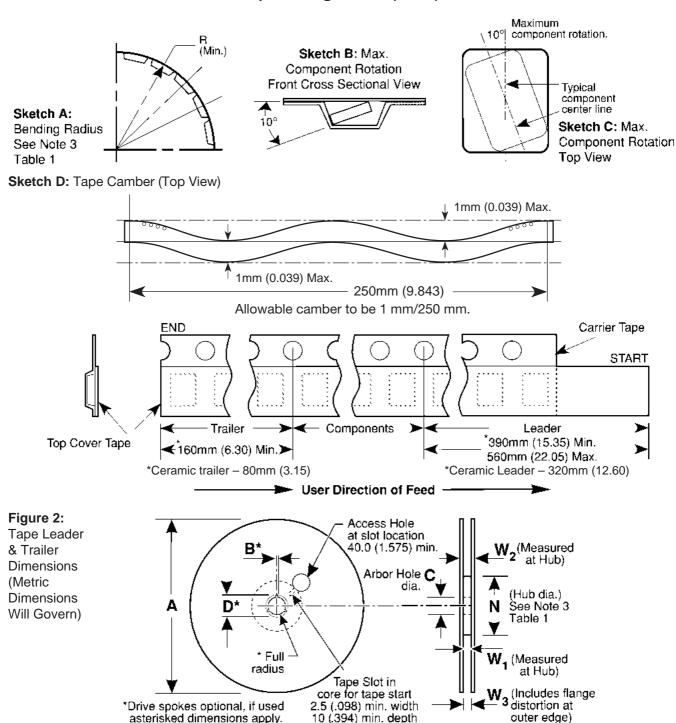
Reel Dimensions (Metric Dimensions will govern)
